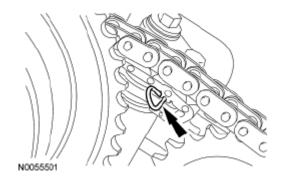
Locating Lockpin Courtesy of FORD MOTOR CO.
